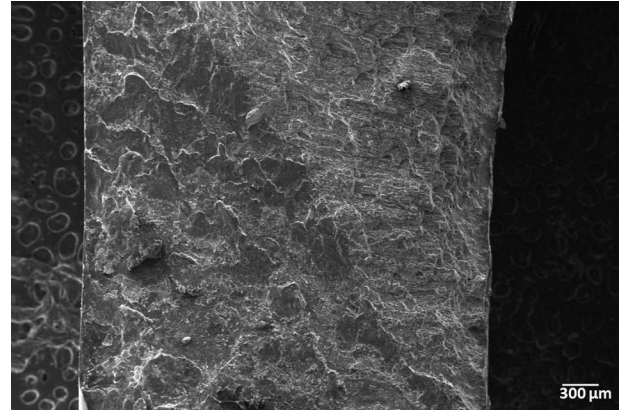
Low magnified of fracture surface of AA 7075 cracked component
